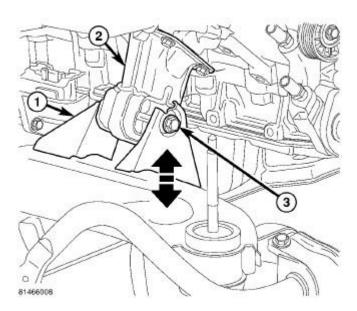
ENGINE MOUNT BOLT Courtesy of CHRYSLER LLC
